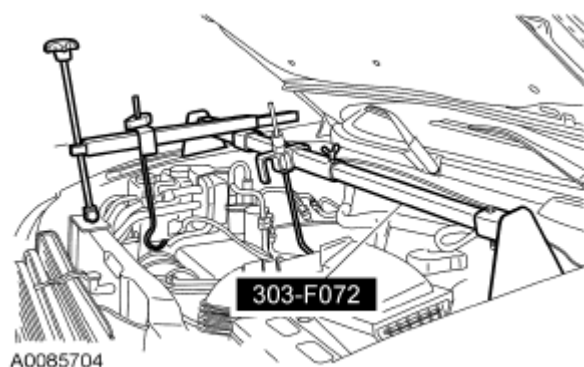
Using Special Tool (303-F072) To Raise Engine
